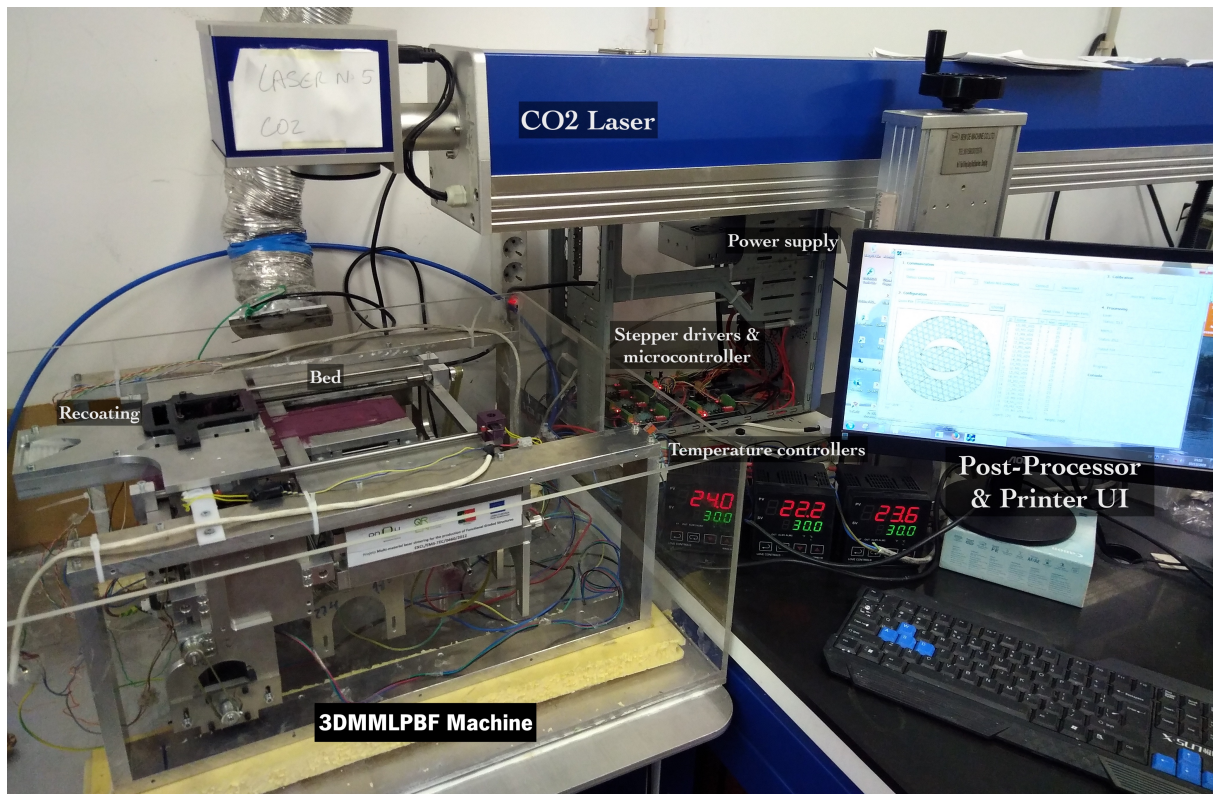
3DMMLPBF equipment v1.0: Machine, Laser, and Post-Processor and Printer UI
